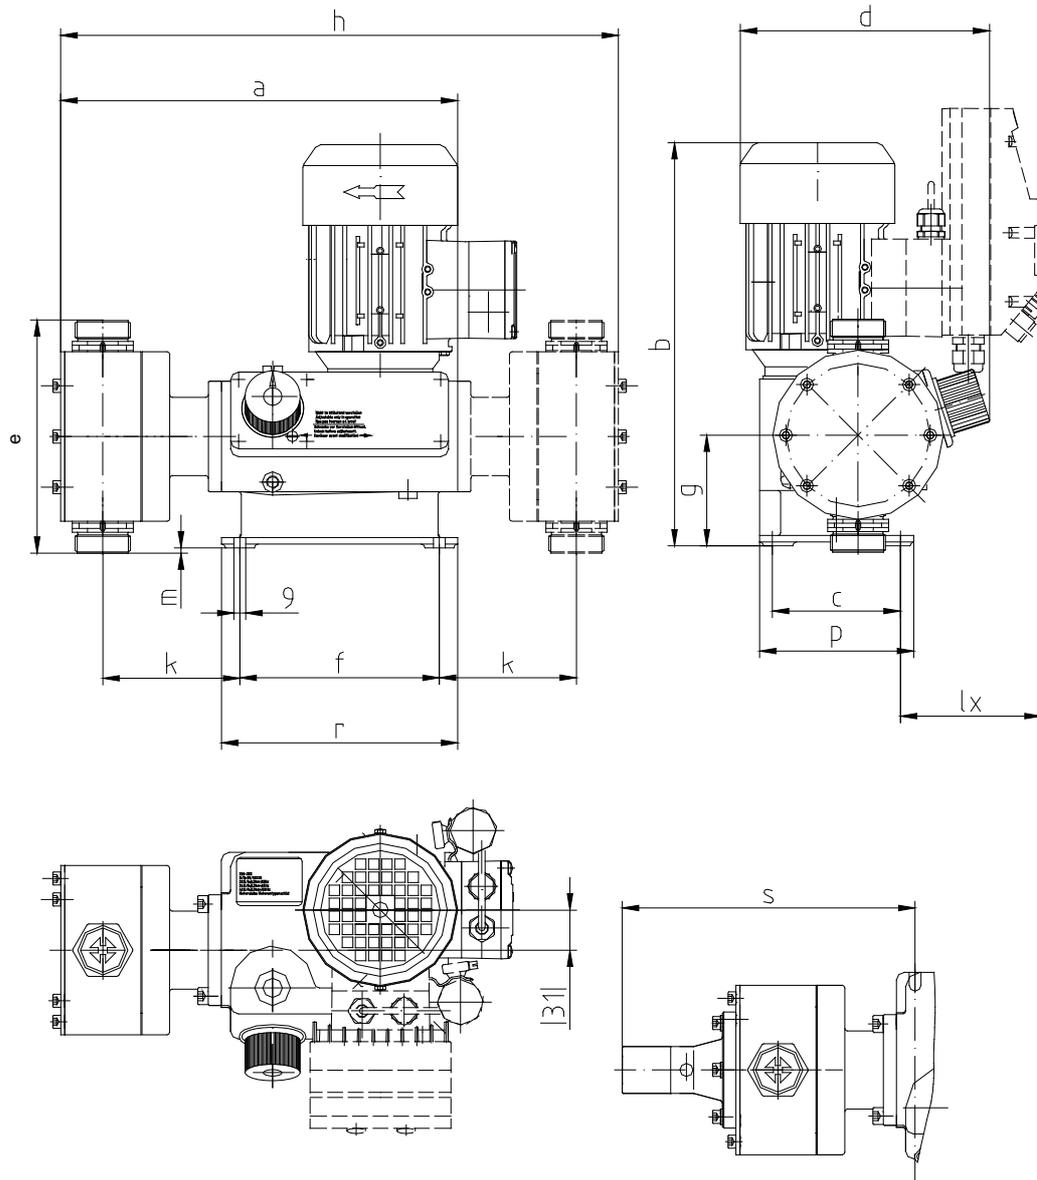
Dimensional sketches of DMX 226 (part 1)
